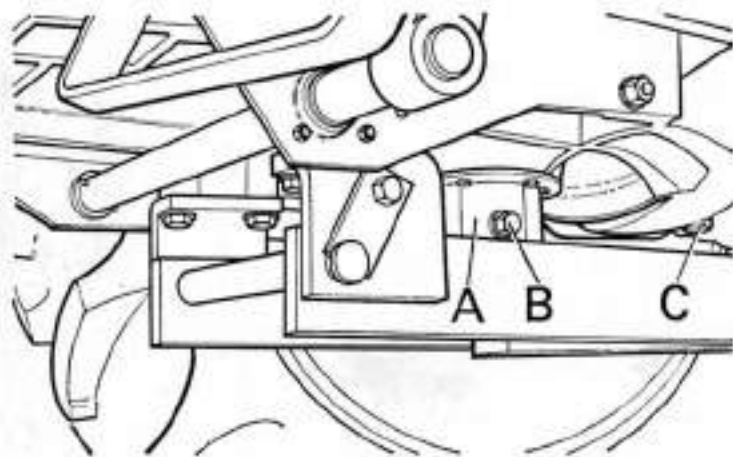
/21. HYDRAULIC FILTER HOUSING
